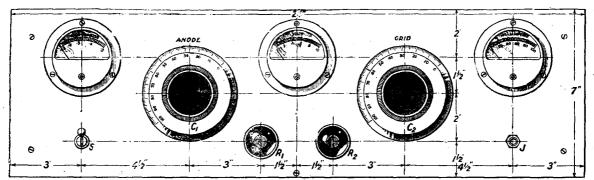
All drilling centres may be determined from this drawing provided that the same components are used. Blueprint No. 173a free.
